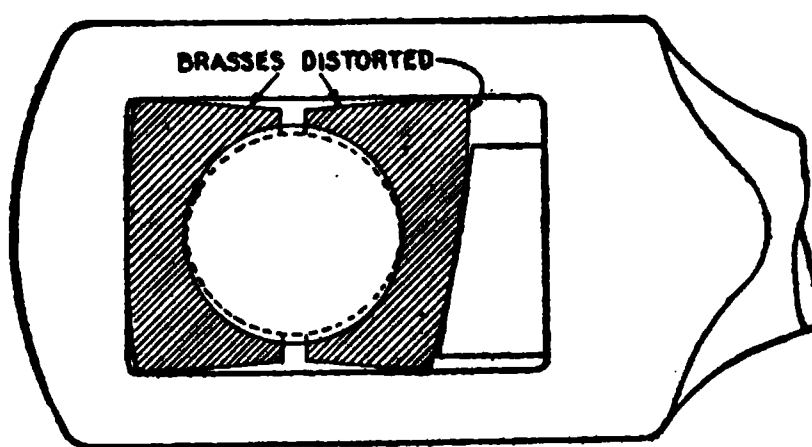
,040.—Gripping of the connecting rod brasses due to uneven expansion in heating.
